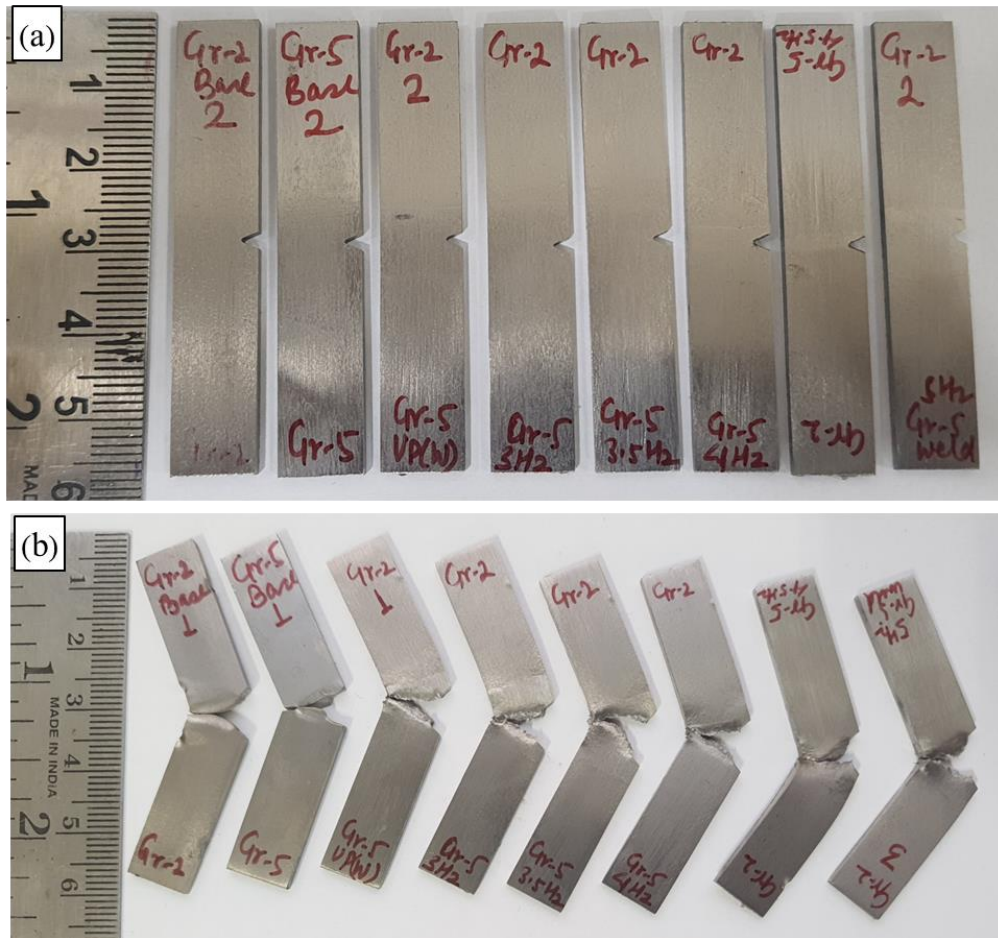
(a) Charpy impact test specimens of base and dissimilar welds at different frequency with notch at the center of the weld; (b) tested and broken specimens of base and dissimilar weld at different frequency with a notch at the center
